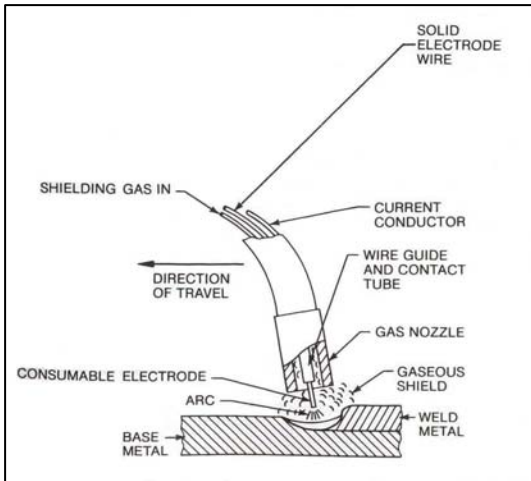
Illustration of Gas Metal Arc Welding process.¹
